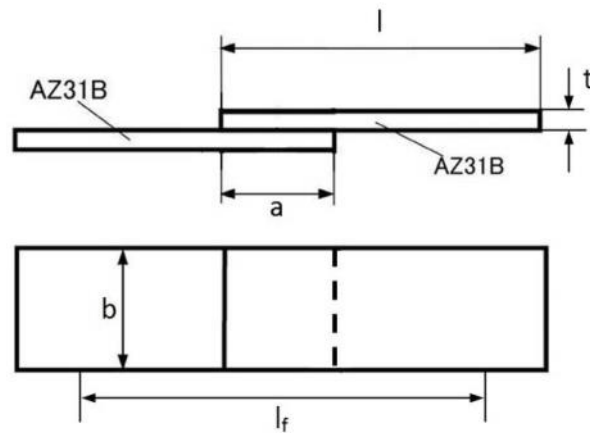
Specimen dimensions and configuration for shear tensile testing after laser welding
